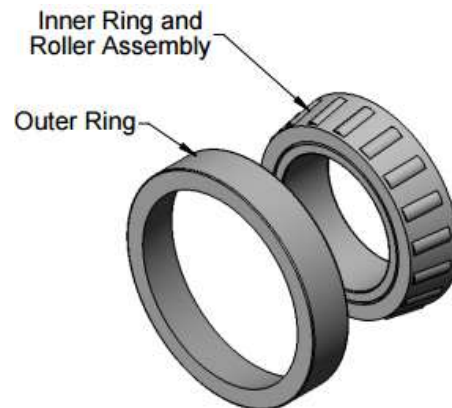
Assembly model of tapered roller bearing showing bearing and nesting ring
